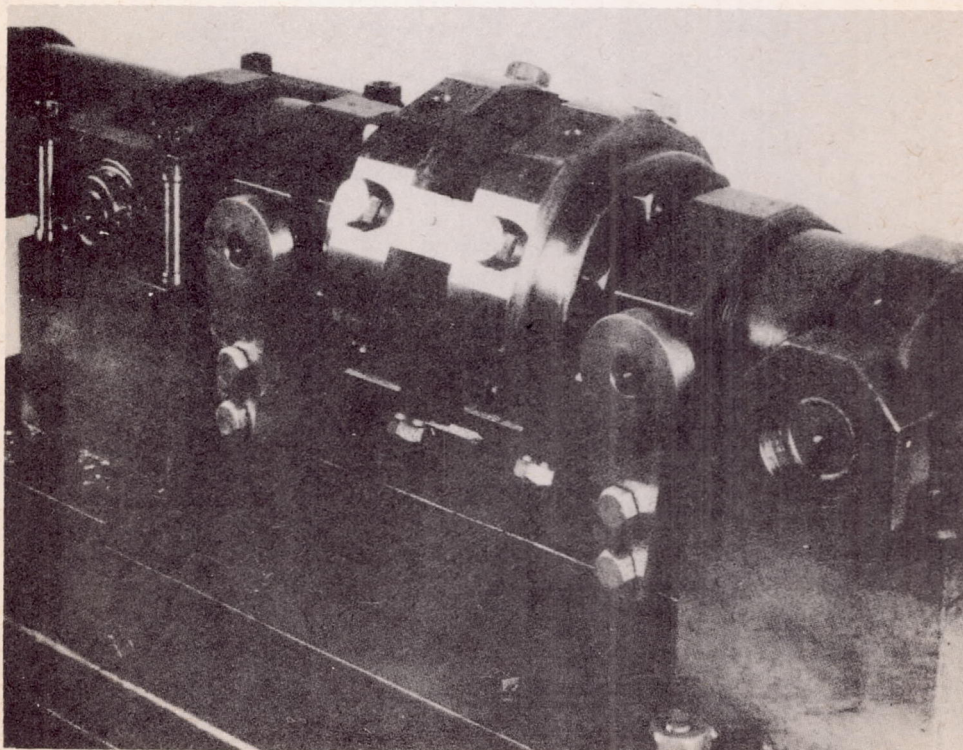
Fixtures for loading riveted joints in fatigue testing machine.
